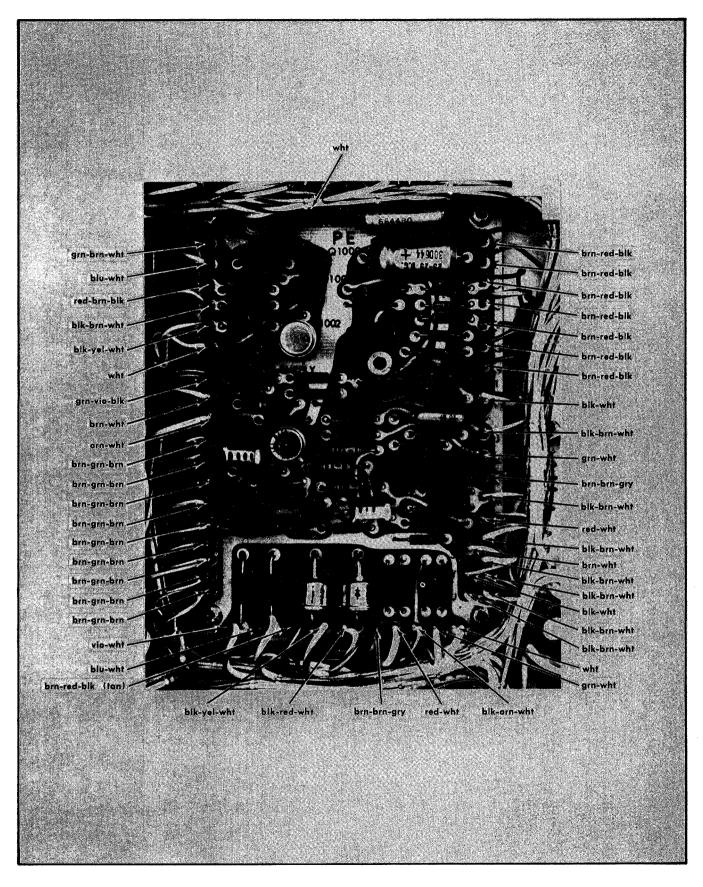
Power Supply Circuit board assembly with wiring color code.
